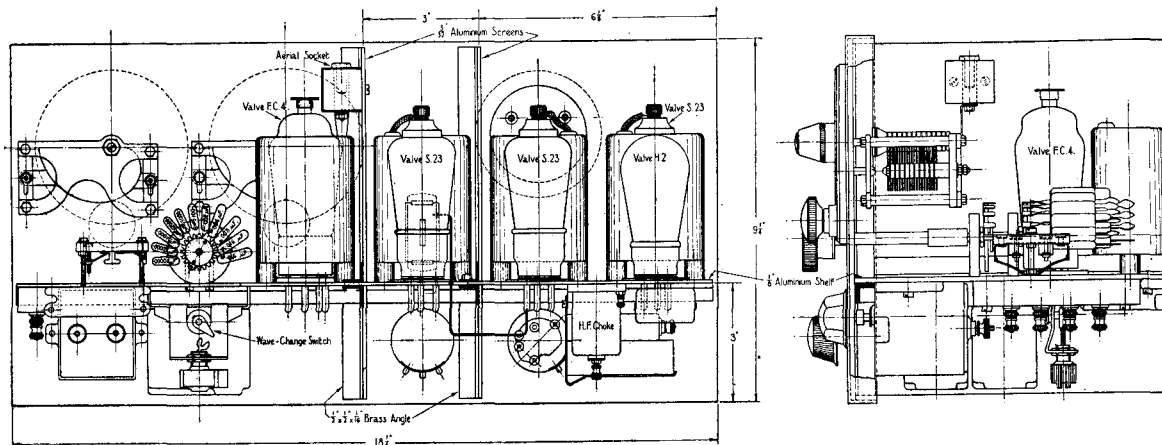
BACK AND SIDE ELEVATIONS OF SET.
